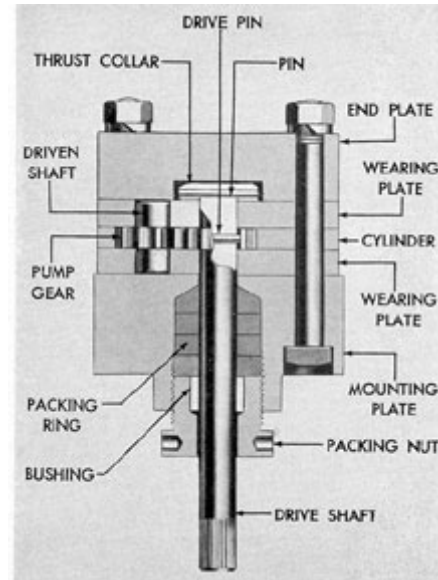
Cross section of Northern fuel oil pump used on GM 8-268 engine.
